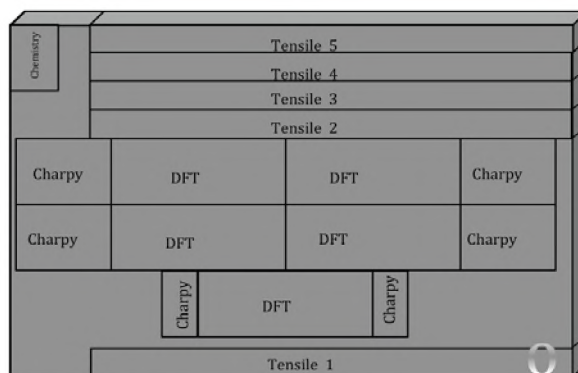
Schematic drawing of CES cast plate showing approximate locations from which test specimens were removed.
